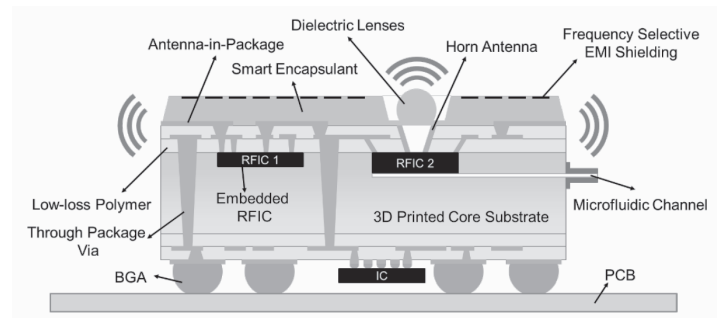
Schematic of a fully integrated 3D stacked module enabled by 3D printing and inkjet printing techniques [6].
